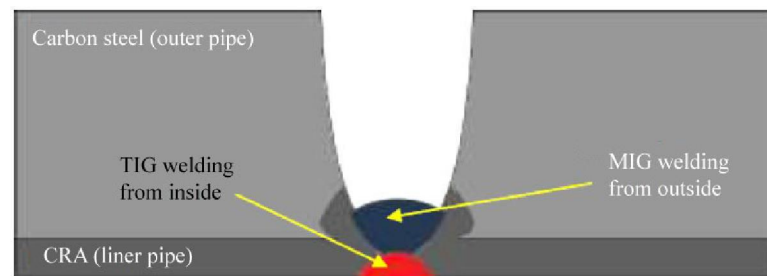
Schematic representation of the use of GTAW welds for inside of pipe and Rapid arc welds for outside [78]
